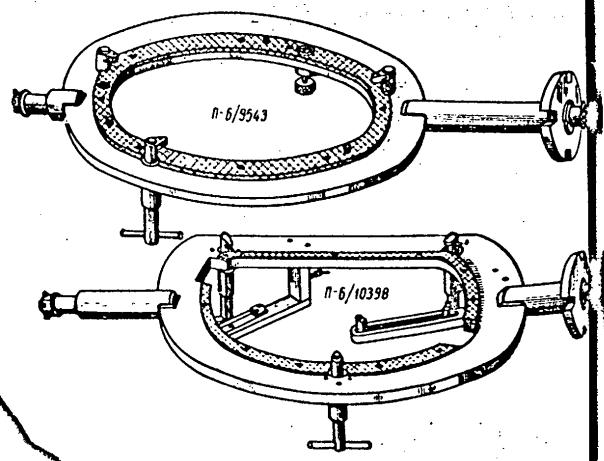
PLATES FOR ASSEMBLY OF SUPERCHARGER AND CRANKCASE REAR COVER
